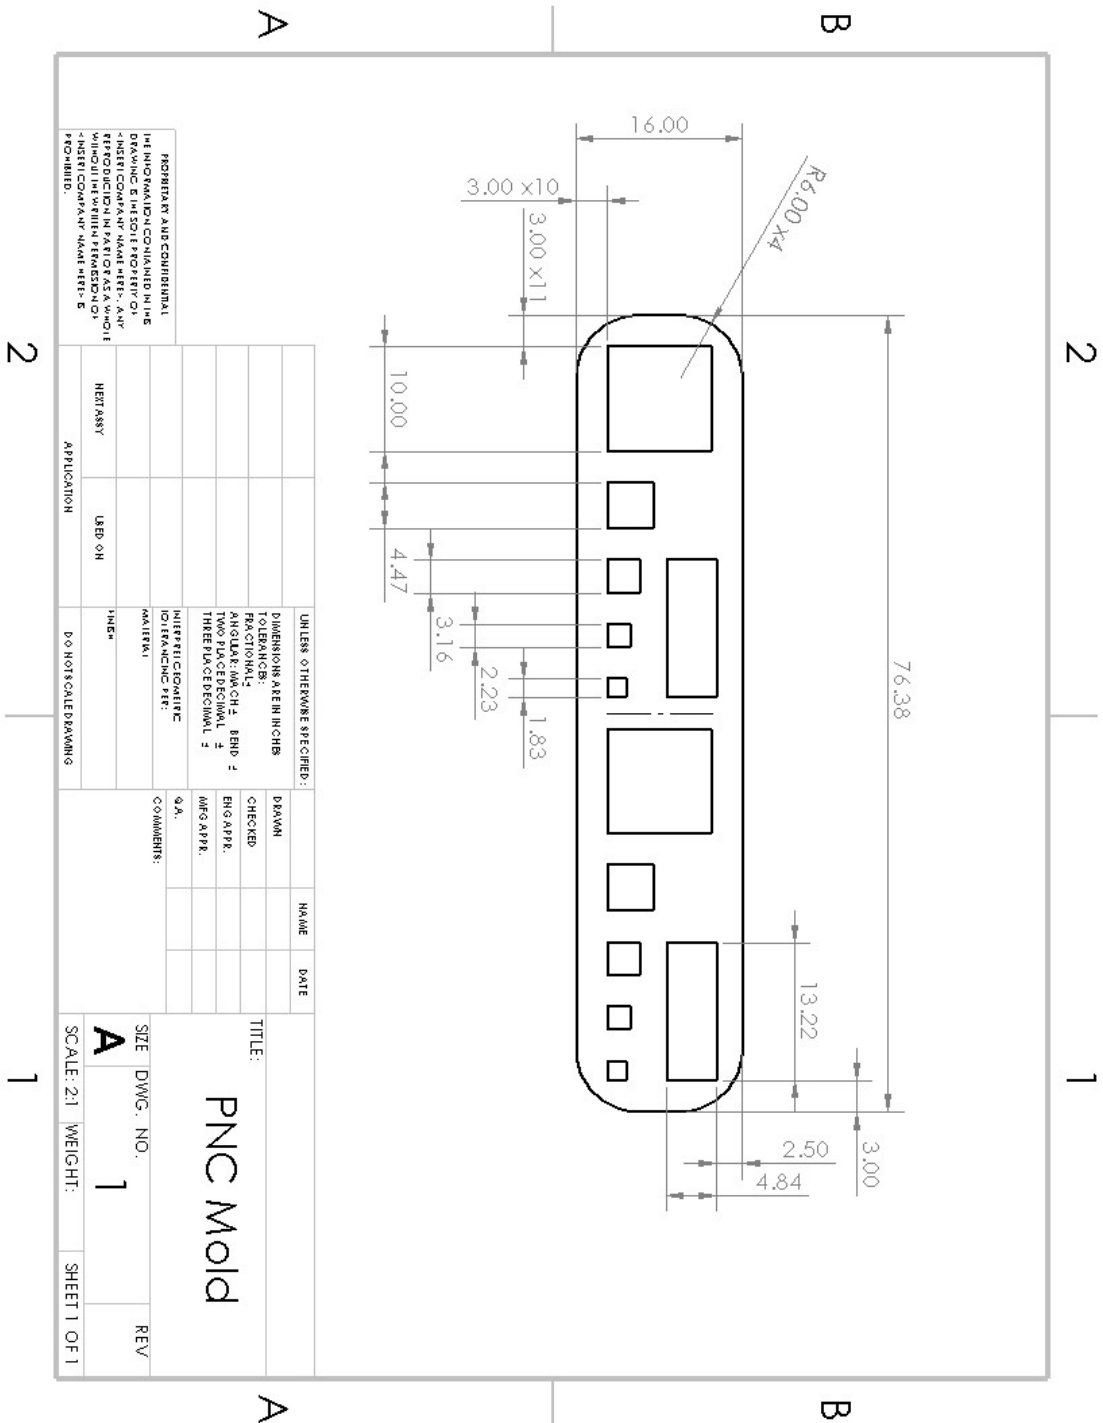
Drawing for the steel mold, in mm. 2:1 scale accurate for figure on a full standard letter page.
